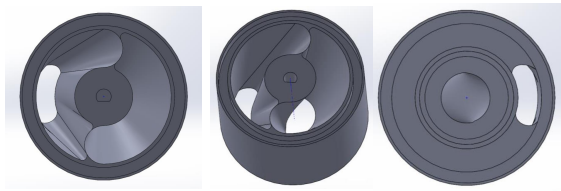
Novel rotating valve as attachment to the centrifugal pump, shown from left to right as a top, side and bottom view.
